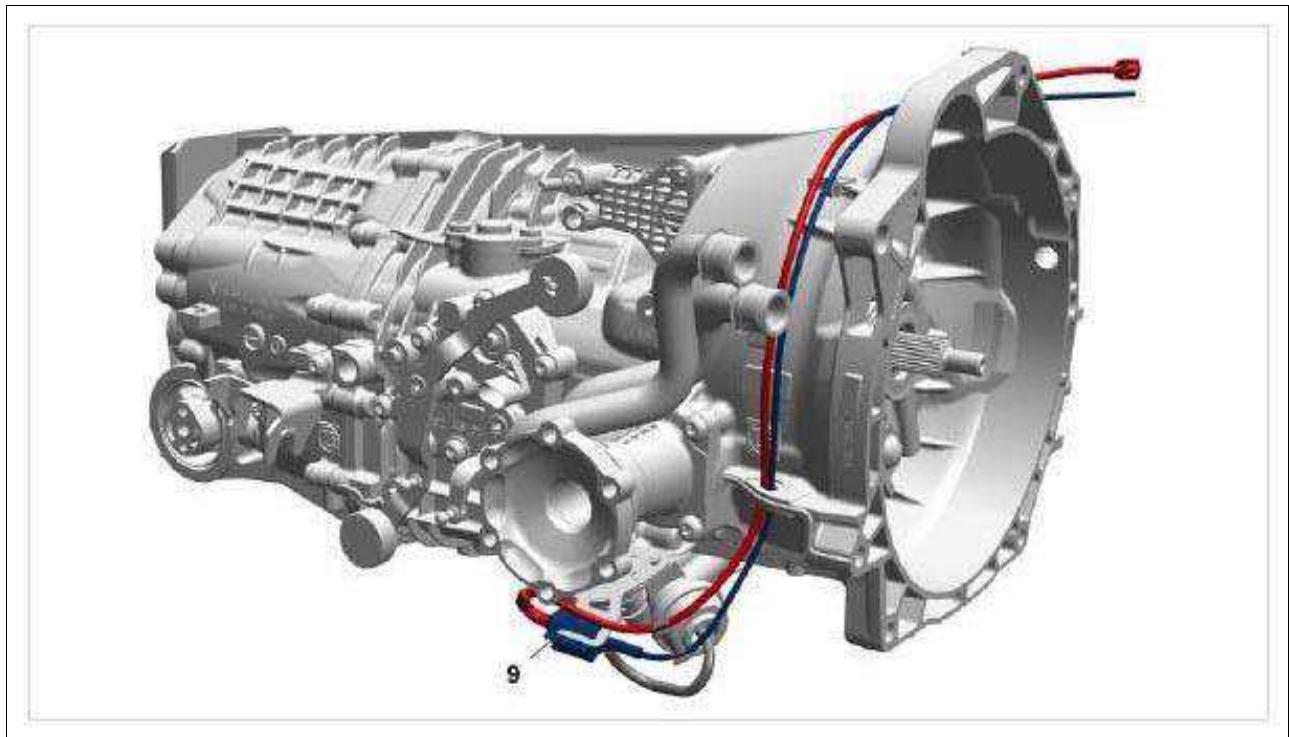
Locating Change-Over Valve For Clutch Fluid Heat Exchanger
